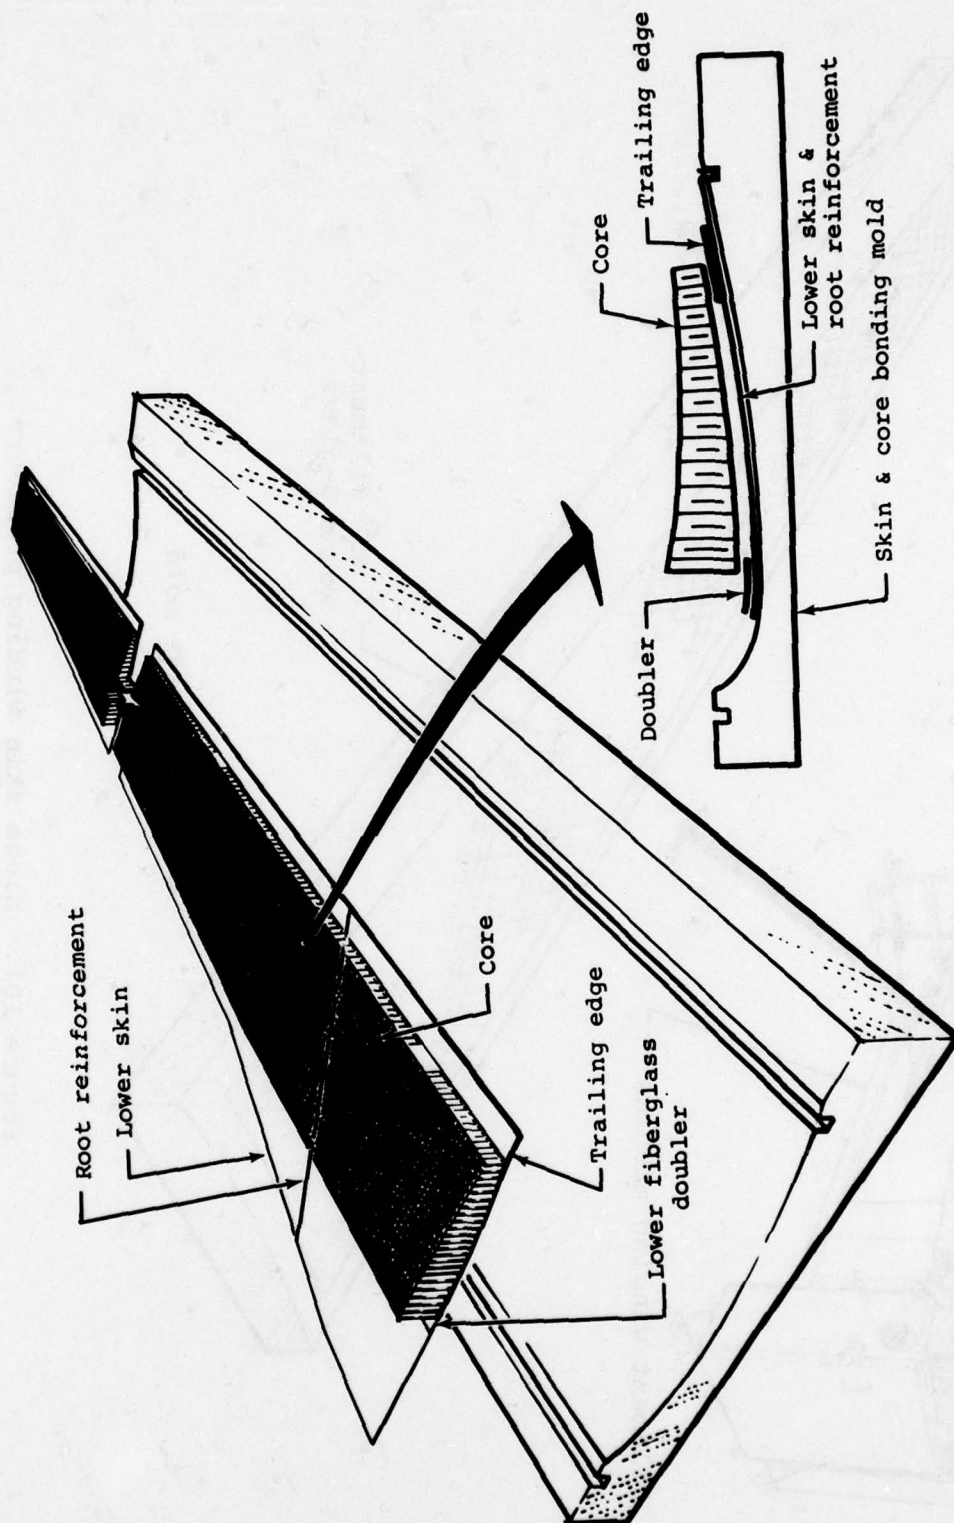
Lower skin layup and warp bonding of honeycomb core blank.
